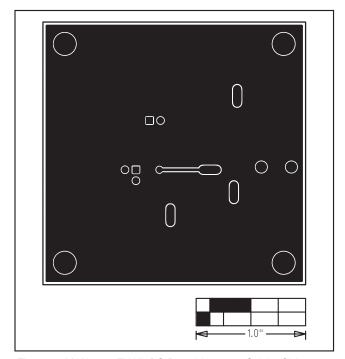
MAX9716 EV Kit PC Board Layout—Solder Side
